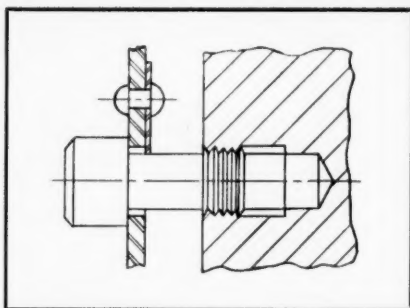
In this design of cover latch, a socket head cap screw is used.
